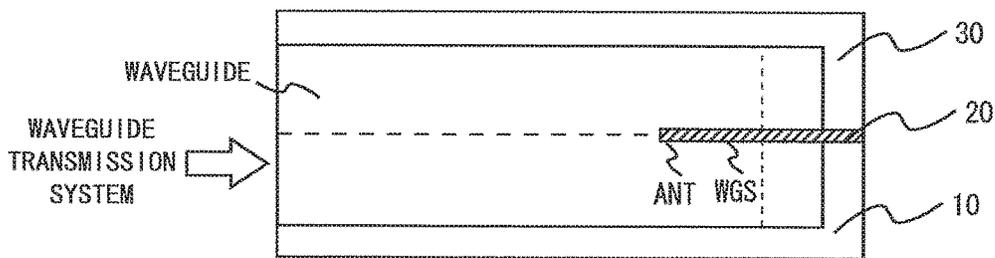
C SECTIONAL VIEW OF WAVEGUIDE COAXIAL CONVERSION DEVICE TAKEN ALONG LINE II-II
